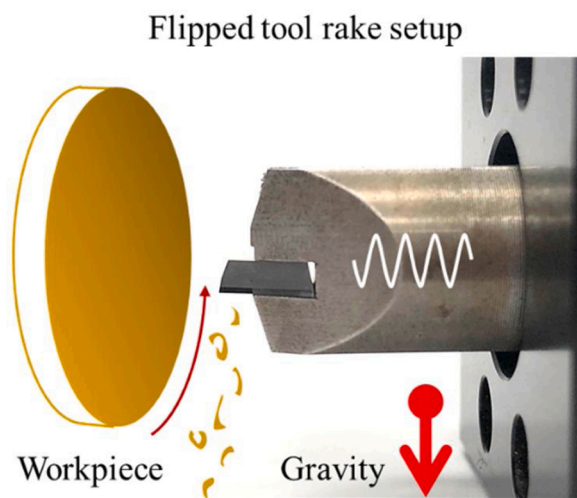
PCD tool with flipped tool rake installed on the horn of the ultrasonic vibrator.
